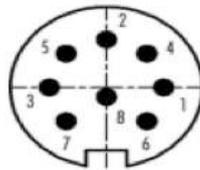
A 8-DIN sensor connector used in conjunction with KLA-SNR-X-03-HF-A sensor cable
